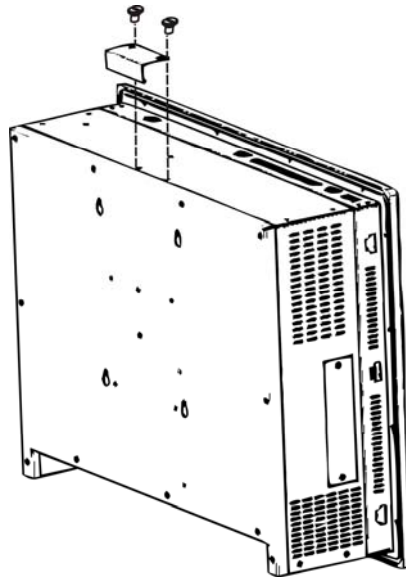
Wall Mounting Diagram – Install wall-mounting hook
